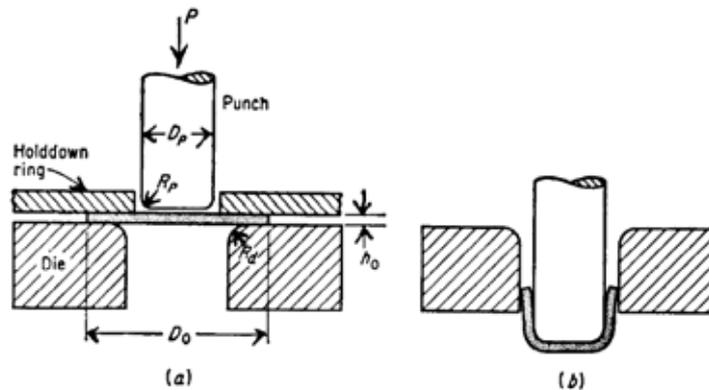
Deep-drawing of a cylindrical cup; (a) before bending, (b) after drawing.
